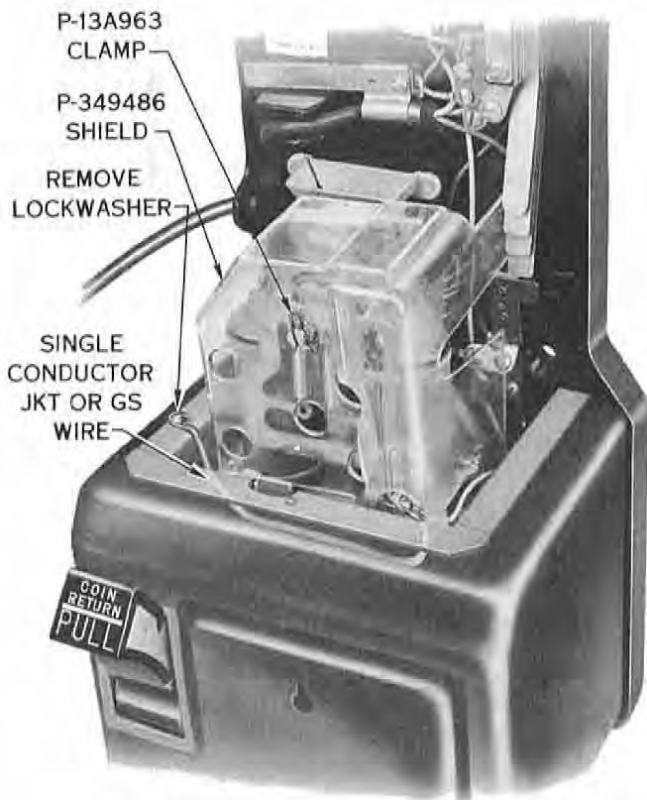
Method of Grounding Housing Assembly, Open-Type Installation
